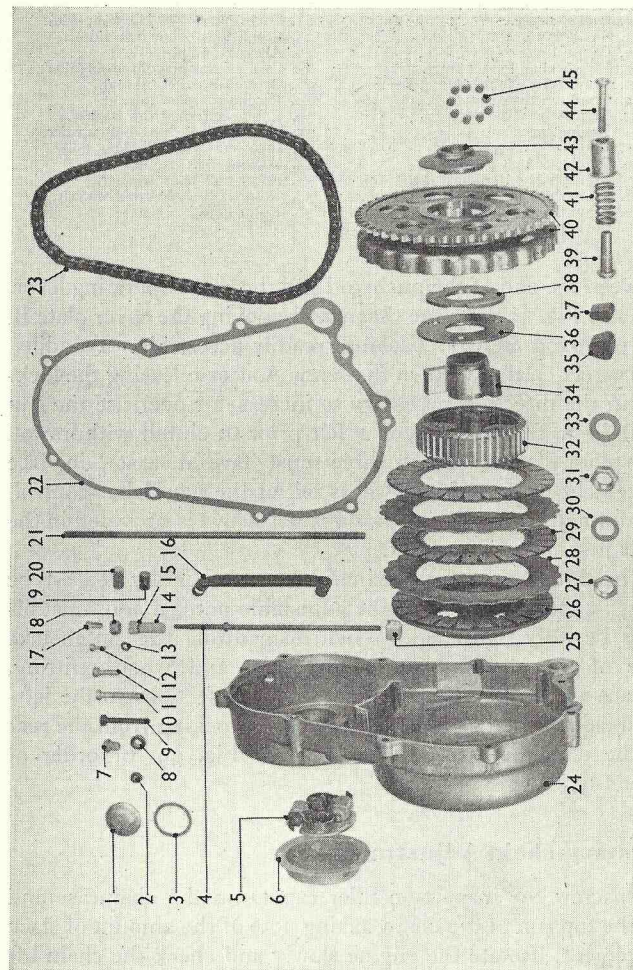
CONTACT BREAKER, CHAINCASE, CLUTCH AND FITTINGS—LEADER AND ARROW.
